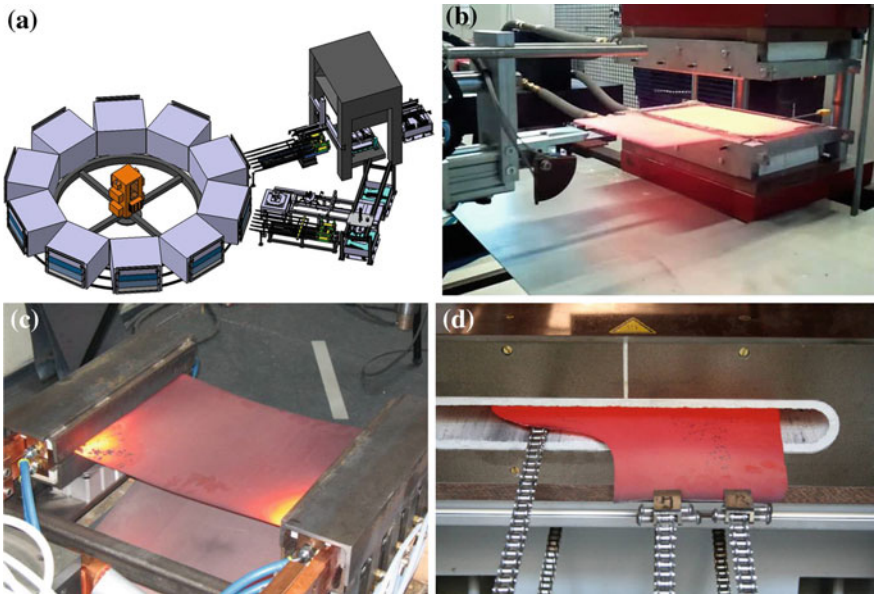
Heating methods under development and/or for use in prototyping: a rotary furnaces [16], b hot plate/contact heating technique [18], c conductive heating [14] and d inductive heating [22]
